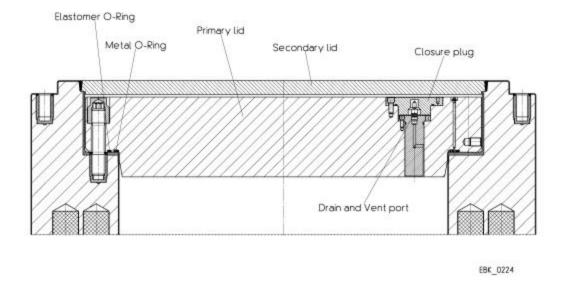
, Lid Assembly, Version 2: Welded Closure (Secondary Lid)
